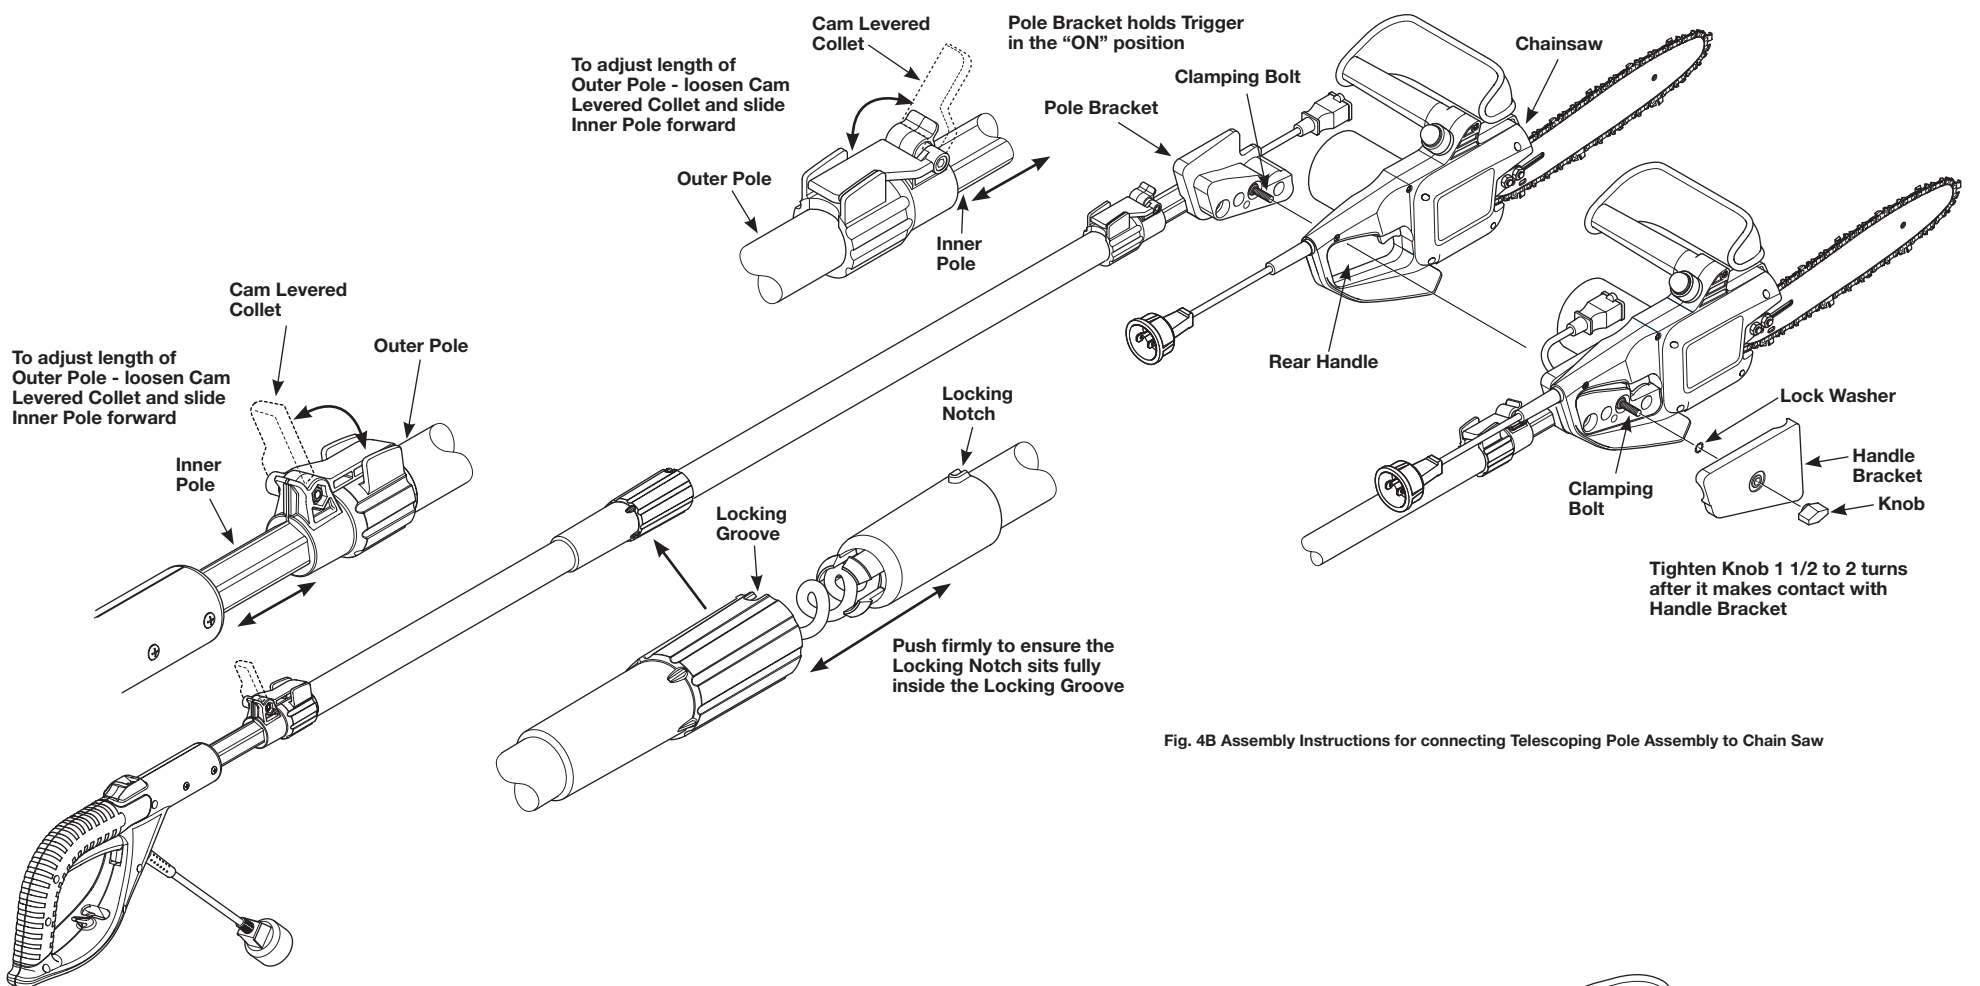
A Assembly Instructions for Remington RM1015SPS Pole Saw
